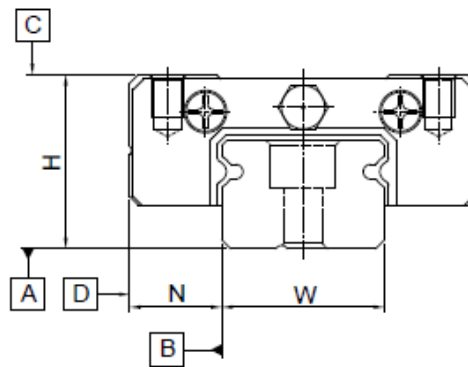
Linear guideway (rail) and carriage assembly with indicated reference planes (Hiwin, 2012)
